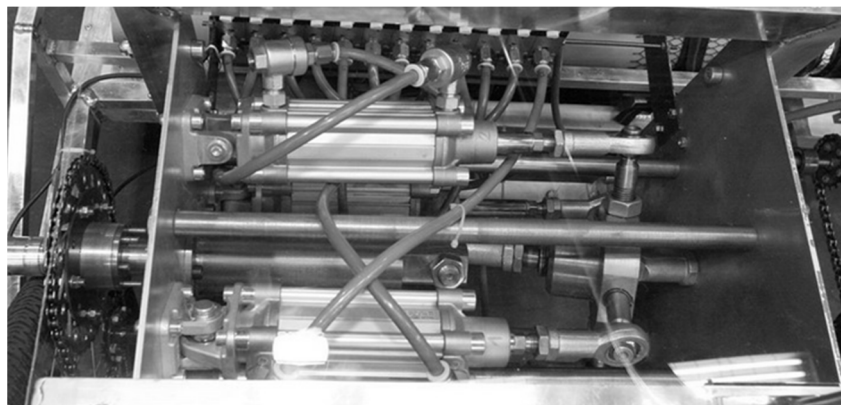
Example of a drive unit utilizing an axial mechanism [8]
